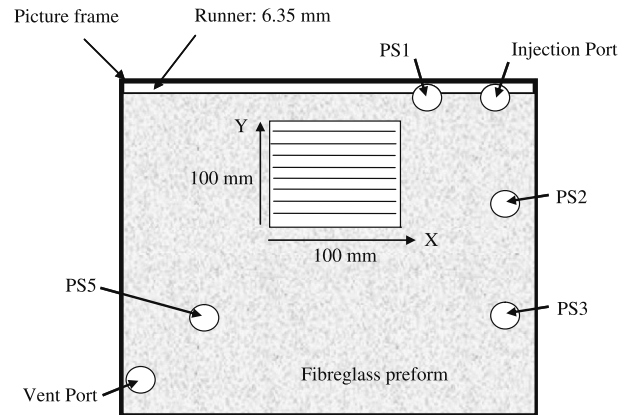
Location of the roughness measurement area and position of the pressure sensors on the moulded sample.
